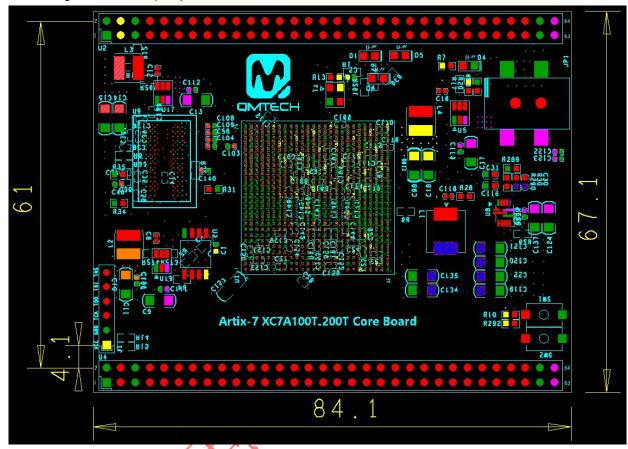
, QMTECH XC7A100T Core Board Dimension
